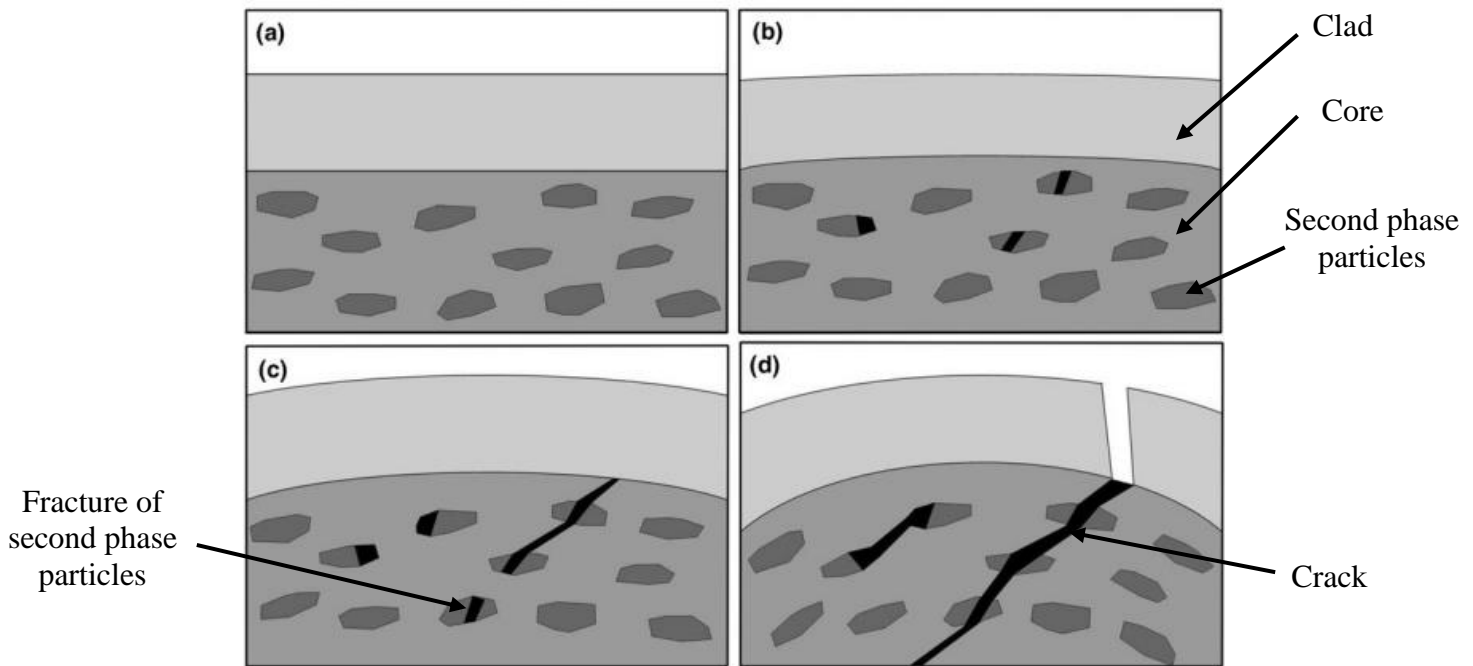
5. Schematic of fracture path progression in a clad sheet under bending [12] through (a) to (d)
